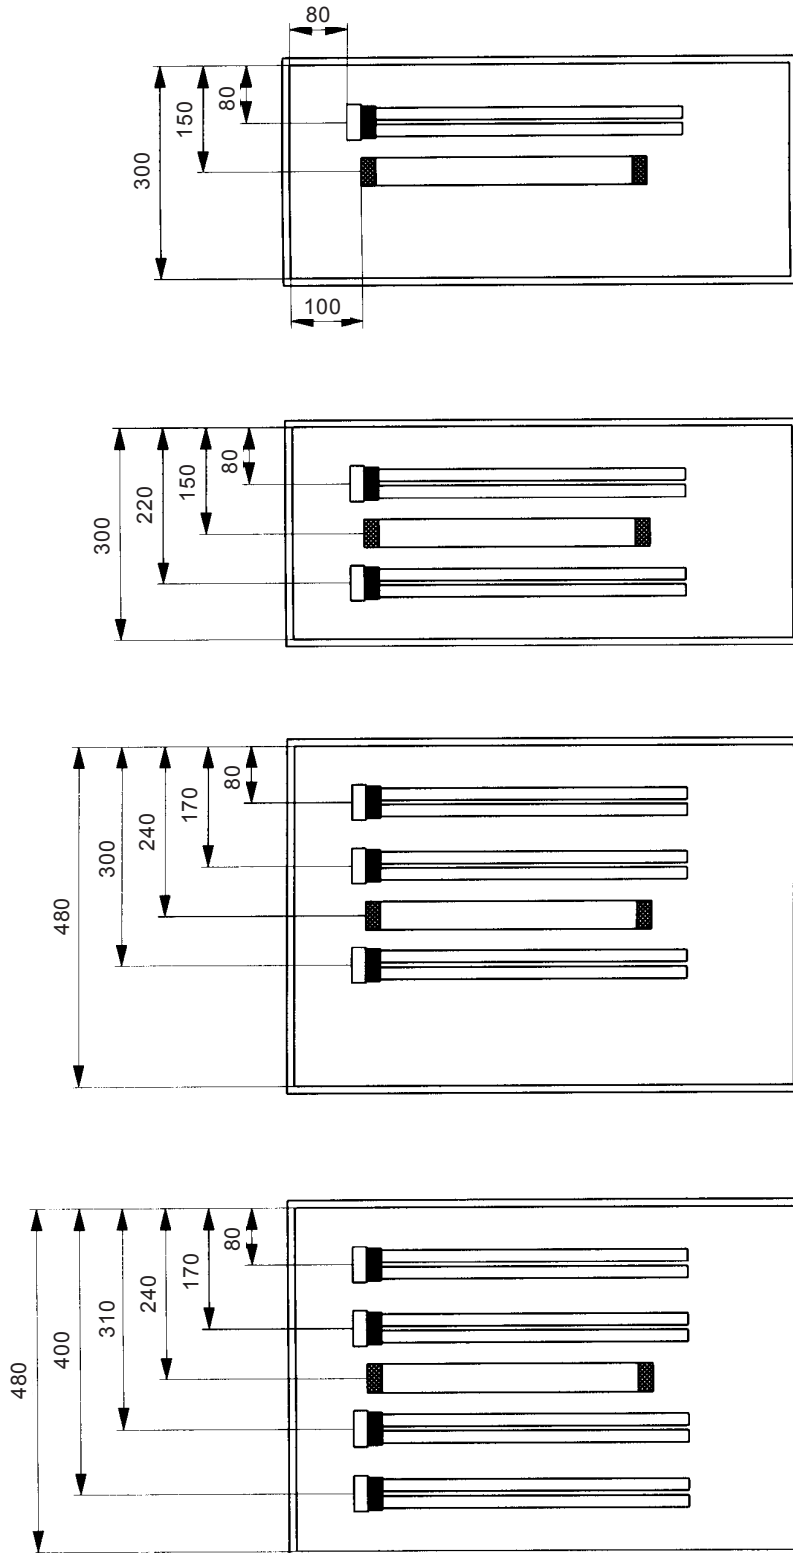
Mounting and wiring scheme of a reference luminaire for two single-capped fluorescent lamps, single-sided electronic control gear terminals
